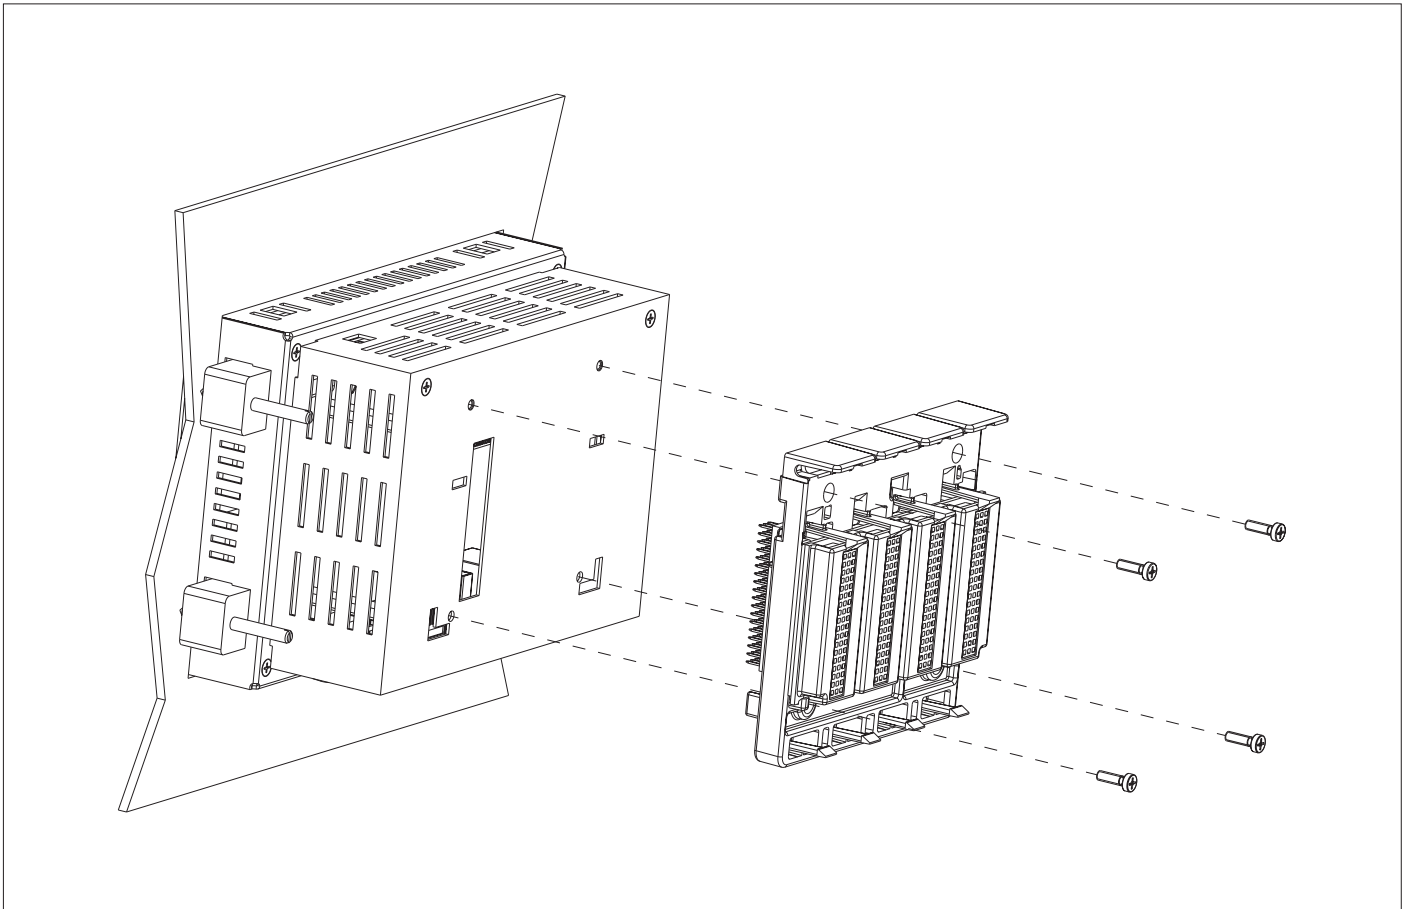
L-BUS4 mounting on GF_VEDO EL57CT
